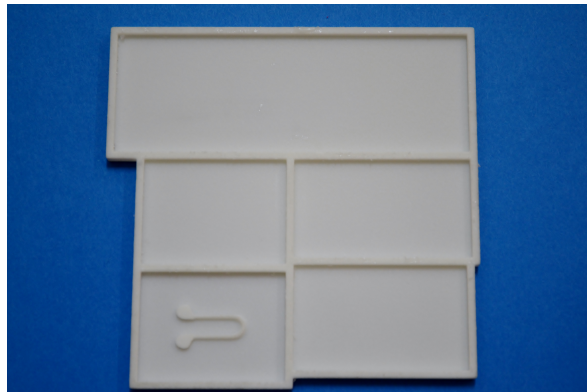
Mold for the tactile sensor printed with SLA Detail Plastic Technology, matching the design in figure 3.7.
